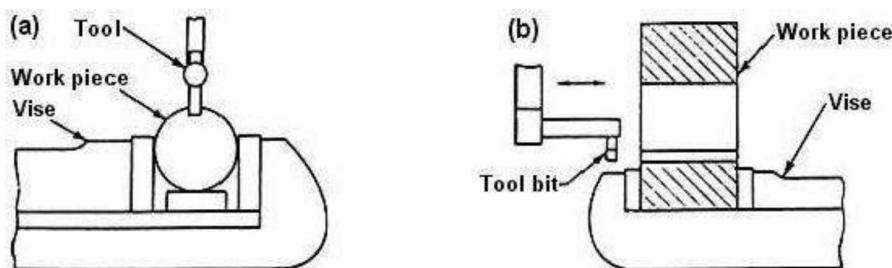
Machining of (a) External keyway and (b) Internal keyway in a shaper
